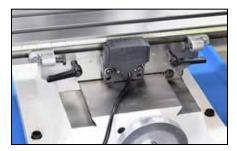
Install the limit switch cover The cover has internal springs. Be sure they are in line with the limit switch plungers. When properly installed the cover should be freely movable from side to side with a small amount of spring resistance.
